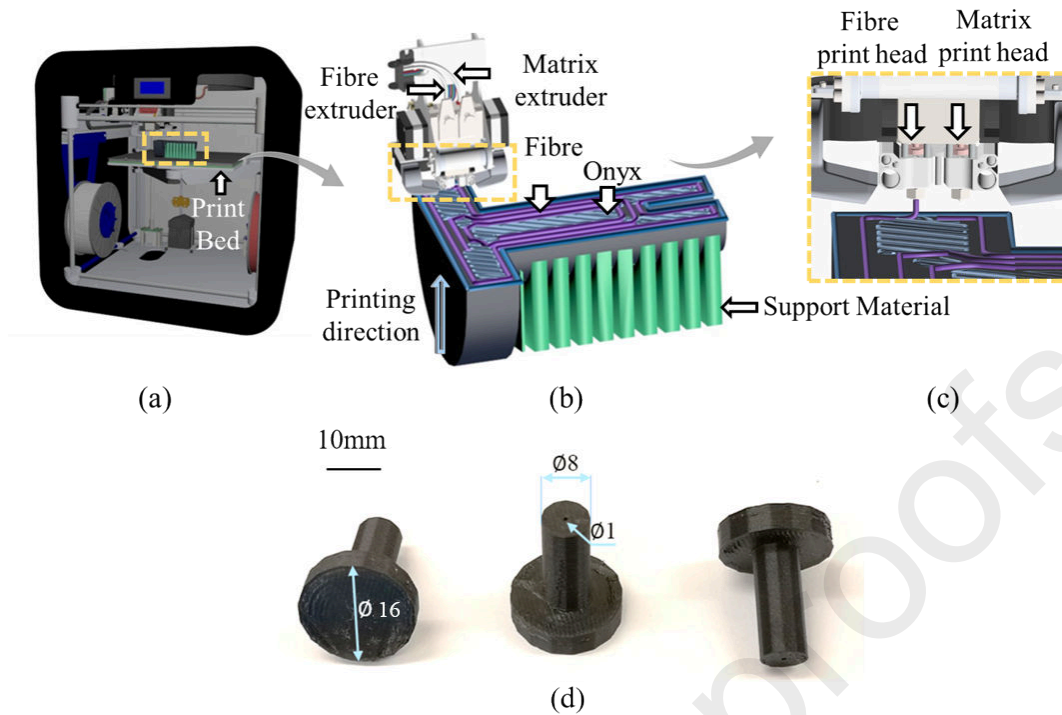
(a) The 3D printer, (b) the printed fastener, (c) the dual printer head, (d) Samples of 3D-printed TPCFs.
